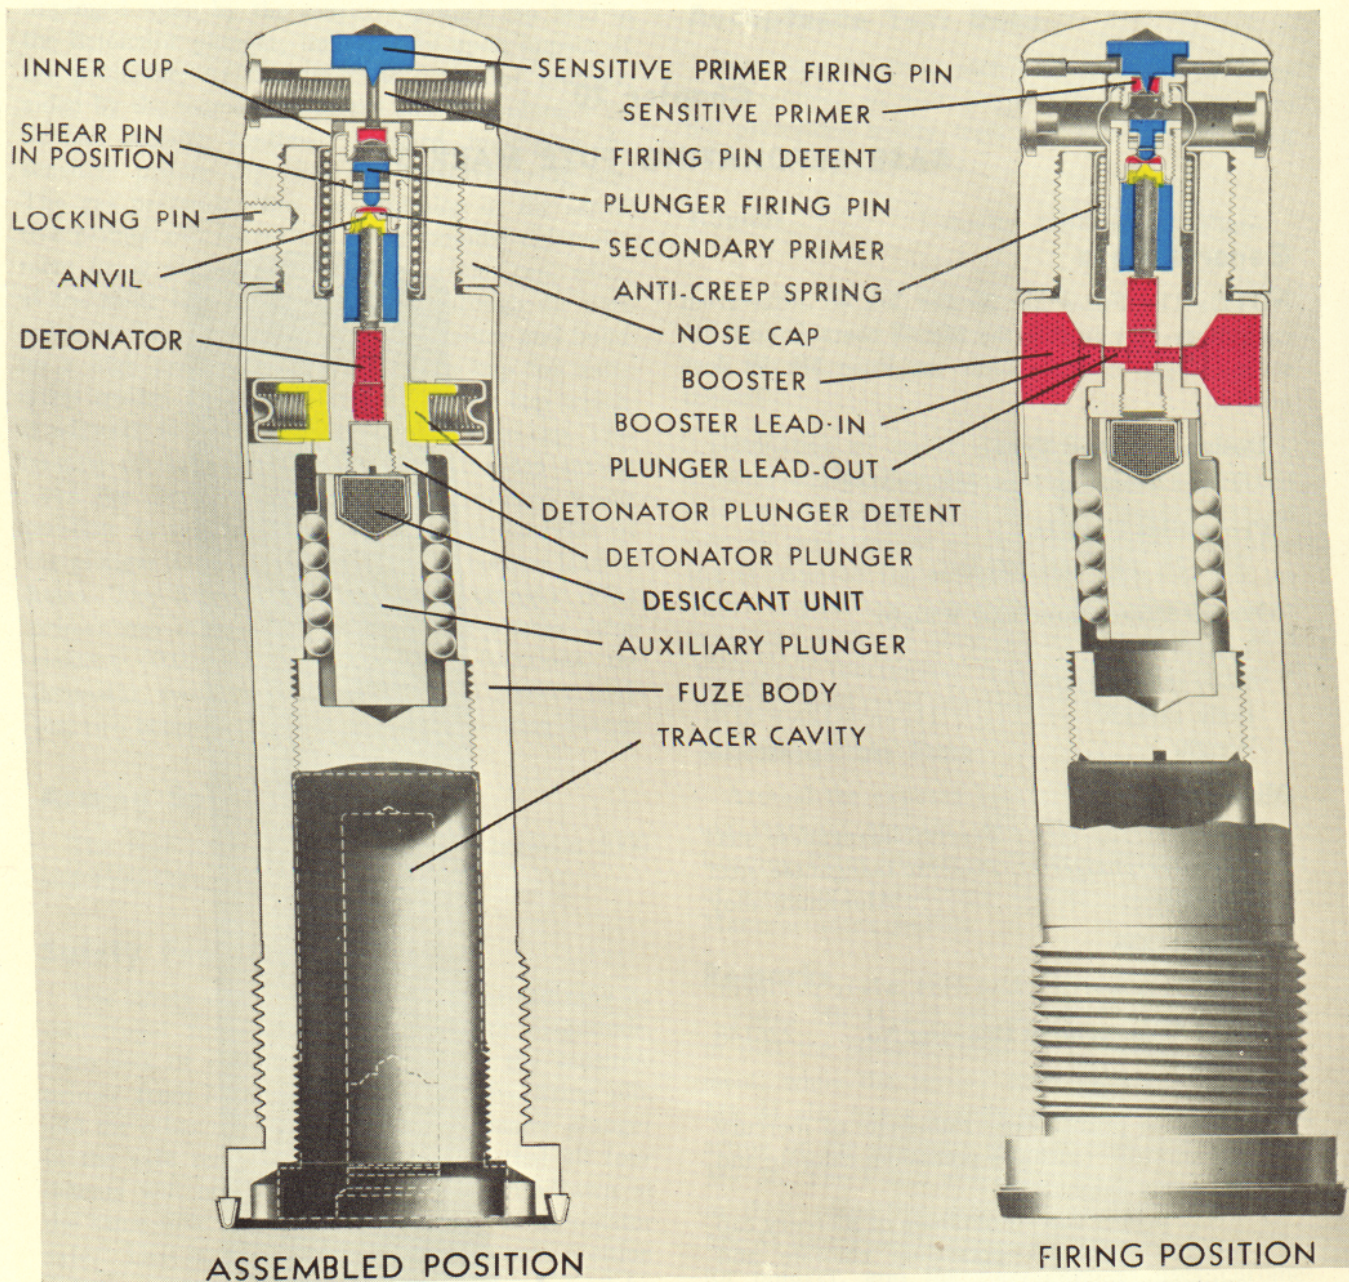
Base Detonating Fuze Mk 39—Sectional View
